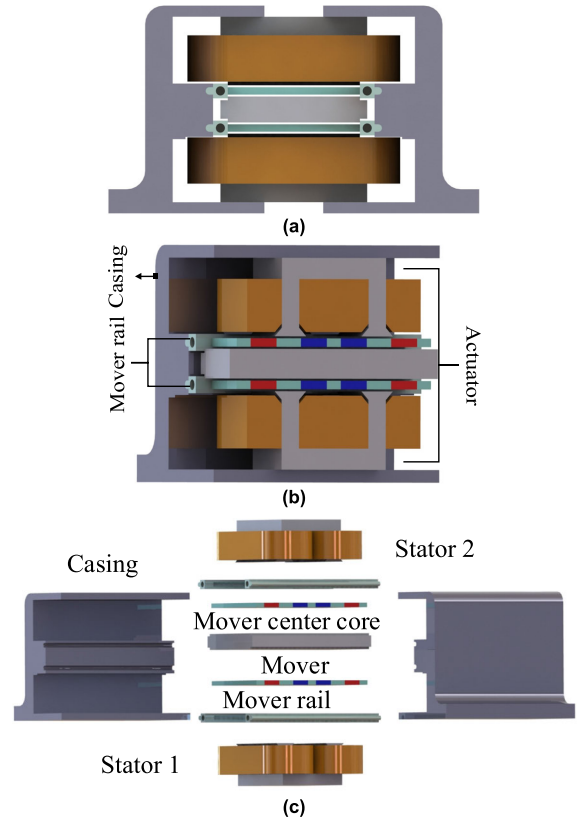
3-D schematic of the investigated LOA (a) front view (b) section view (c) Exploded view.
